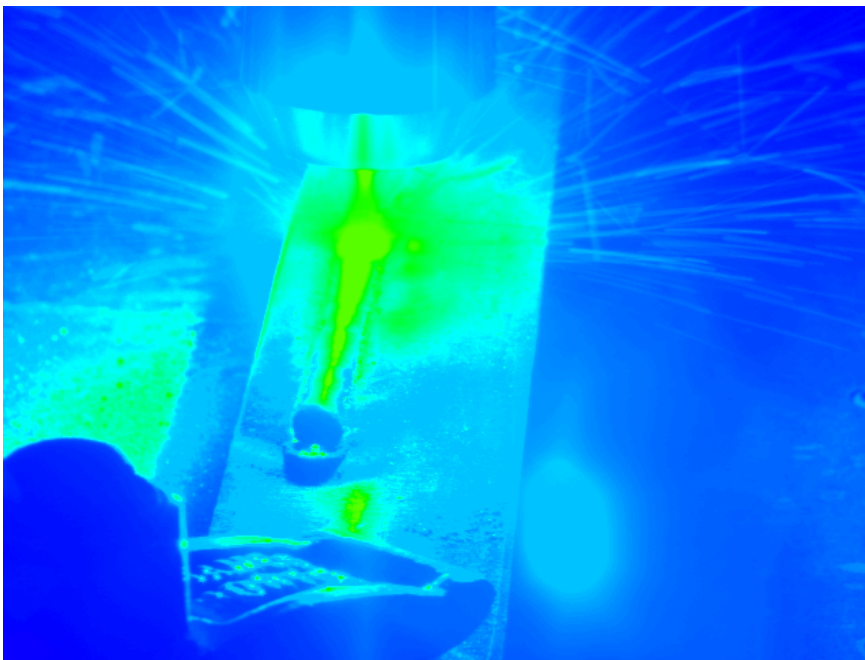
MiKron M9103 thermal image of weld, standard deposition conditions, rear view.
